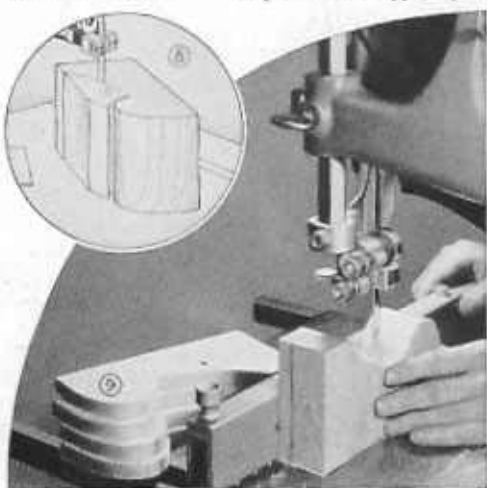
shows the jig loaded and the work being drilled to facilitate turning of the band saw blade. It will be apparent that the jig also provides a guide for any holes which must be drilled through the work. Fig. 1 shows the work being cut, the edges of the jig serving as a pattern. Once a set-up of this
